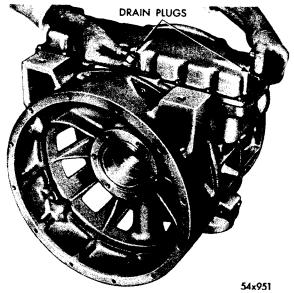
Removing or Installing Oil Pan Drain Plugs
